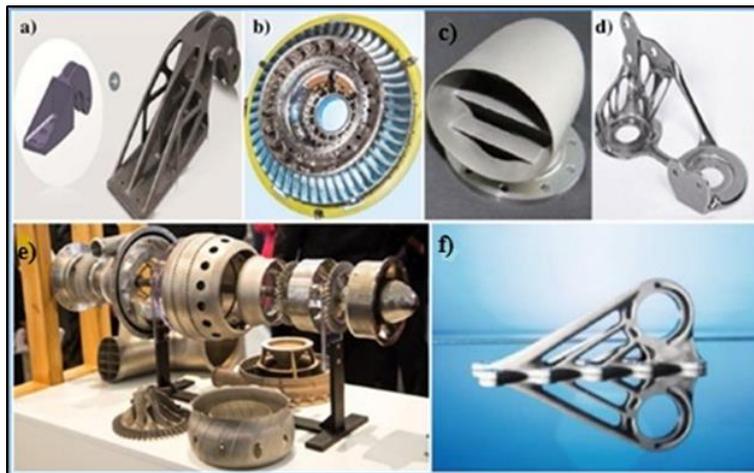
Aerospace components made with AM technology include (a) Airbus's Hing holder, (b) the Rolls-Royce Trent XWB engine made with the EBM method, (c) AM's liquid oxygen flange, (d) an aerospace hinge part made with the laser powder bed method, (e) a gas turbine engine made with 3D printing, and (f) an Airbus bracket connector. (Elif Karayel and Yahya Bozkurt, 2020)
